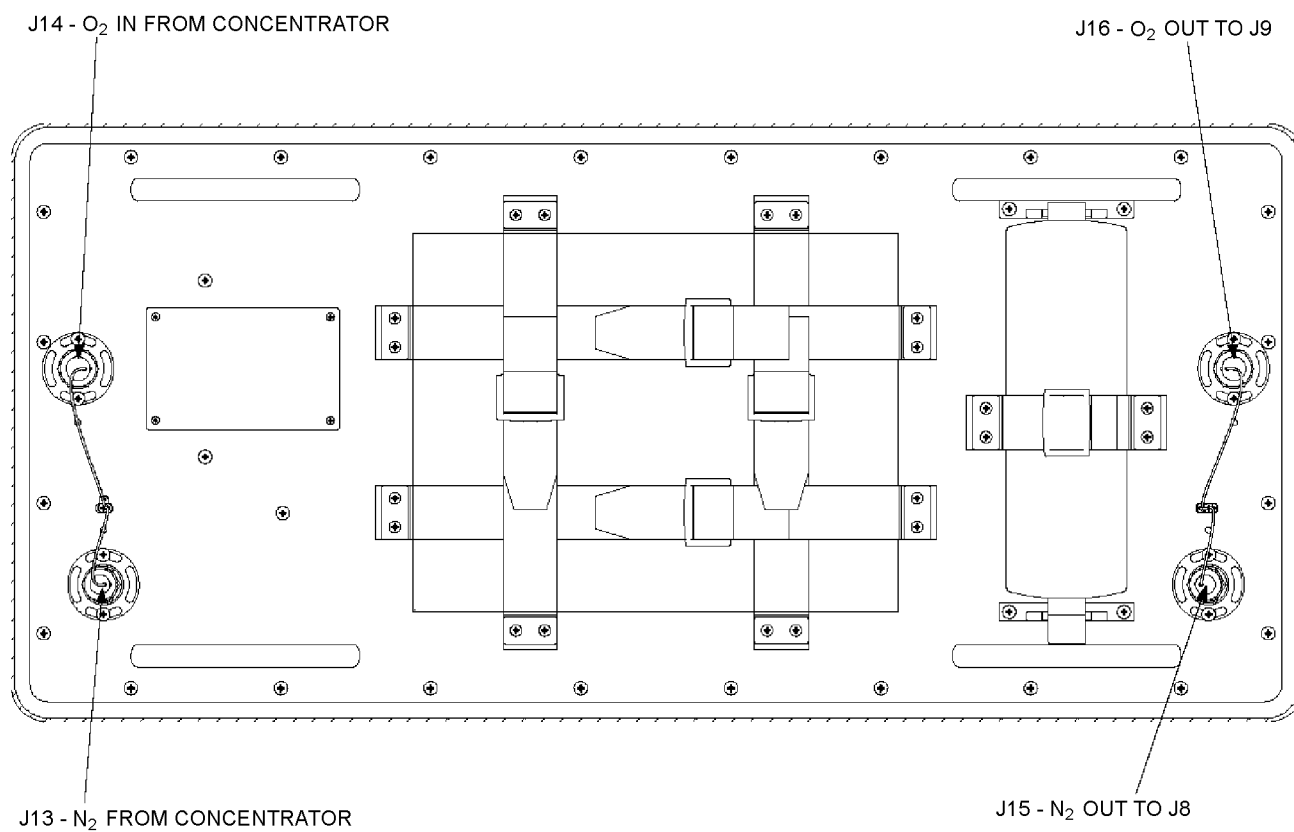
Interfaces (Front Panel of Test Set Box 2 of 2) (Sheet 3 of 4)
